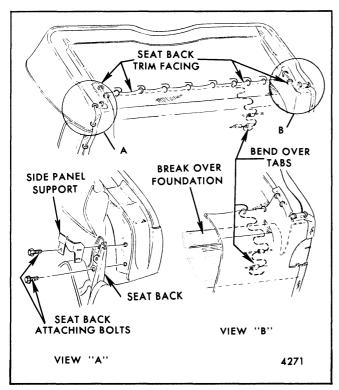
Front Seat Back Attachment - Typical Four Door Attachment - Styles with Full Width Conventional Seat
